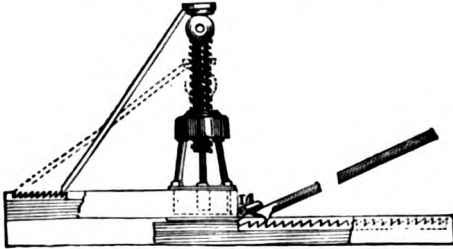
SIDE VIEW OF TRAVERSING SCREW JACK.
